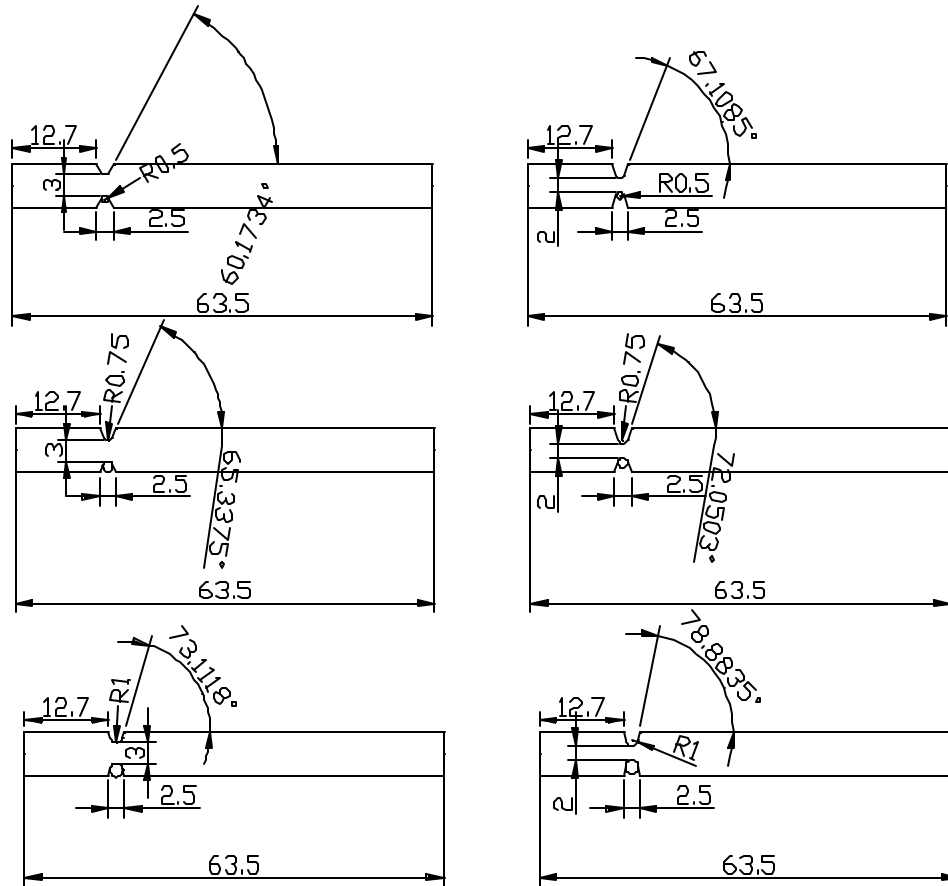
Drawings showing how the “hourglass” shaped cylinders were made. Dimensions in millimeters.
